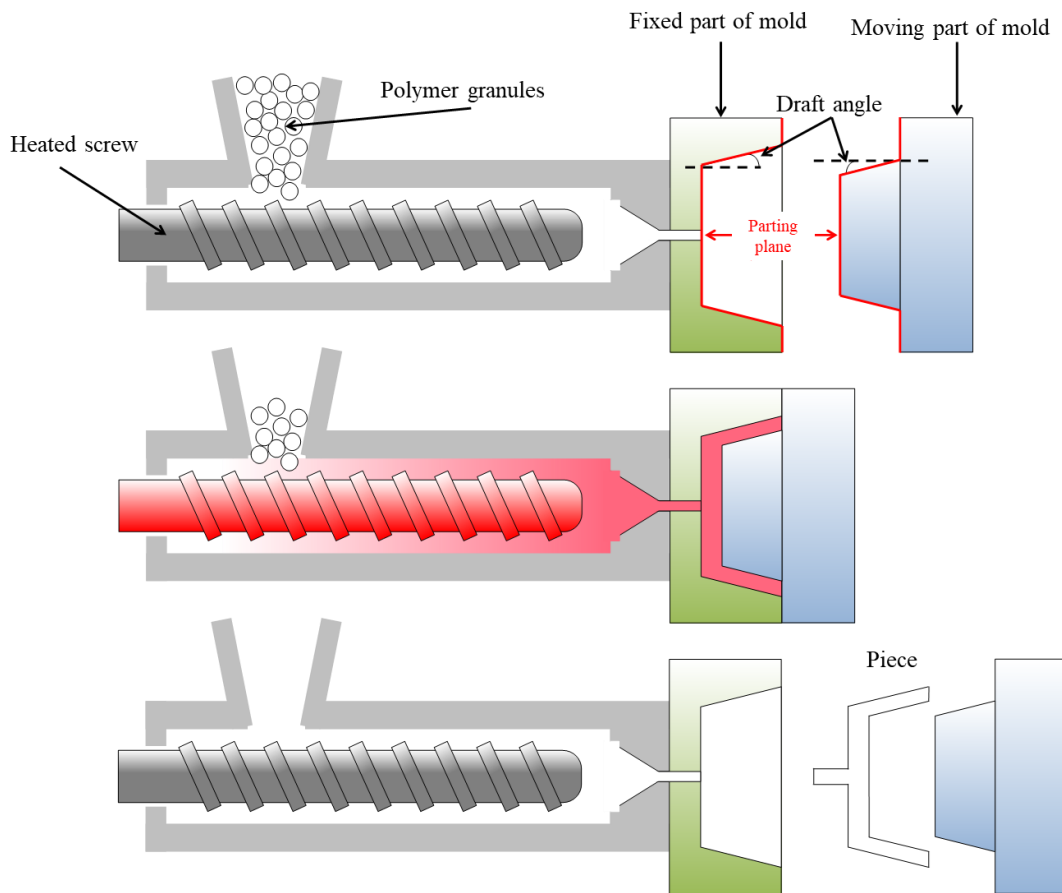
Principle of injection molding of thermoplastic pellets [21]
